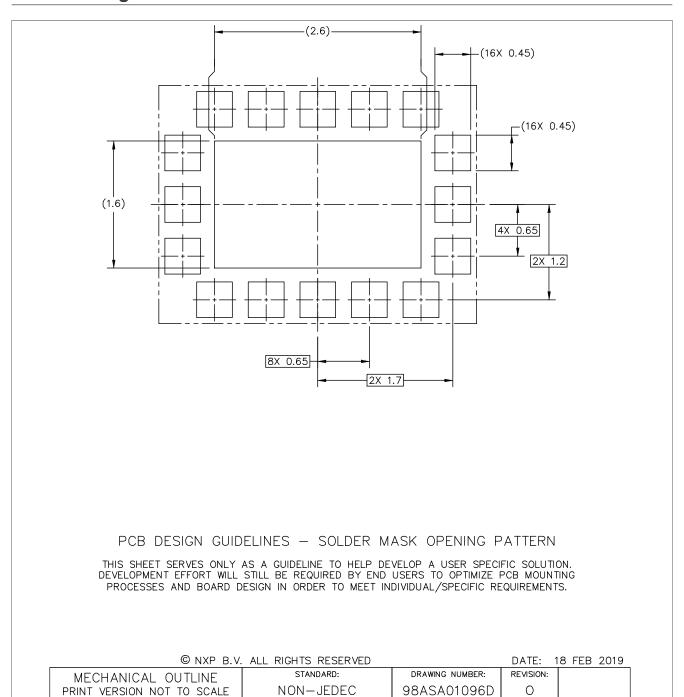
Reflow soldering footprint part1 for HLFLGA17 (SOT1934-1)
